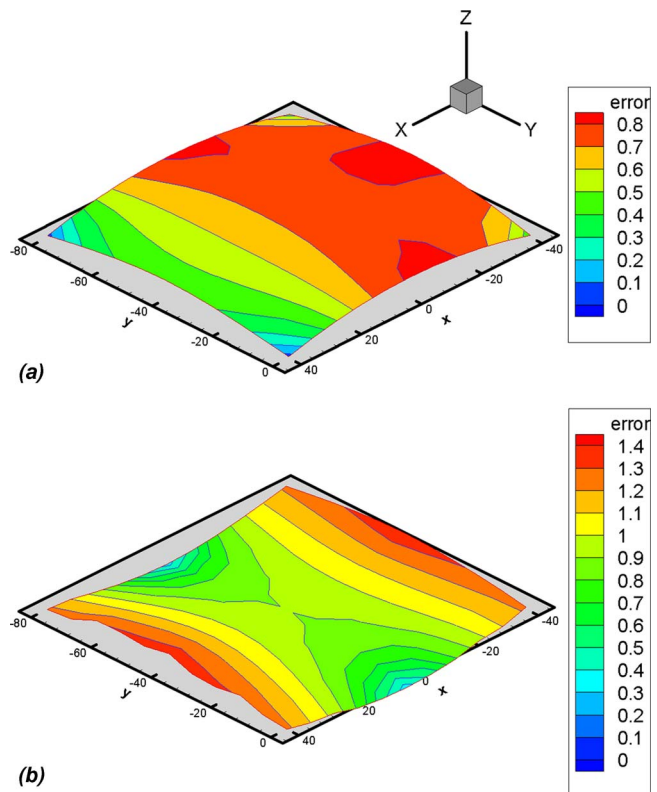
Deviations of top-surface geometry between the formed shape and the desired shape for (a) pillow shape, and (b) saddle shape. The formed plates were measured by CMM and the error unit is mm.
